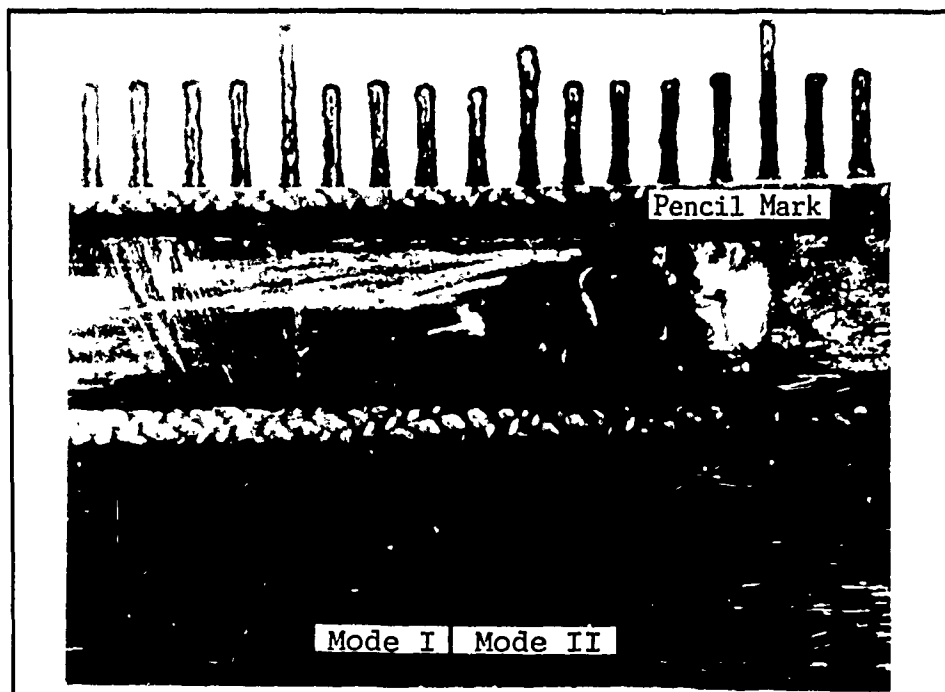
Fracture Surface of Specimen 88C1007 Magnified 6.3X Showing Difference Between Predetermined Crack Length and Actual Crack Length (Small Graduations are Millimeters)
